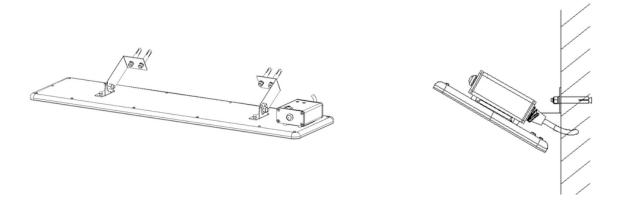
Mounting bracket and anchor dowels provided. Connection from the wall to the infrared heater
